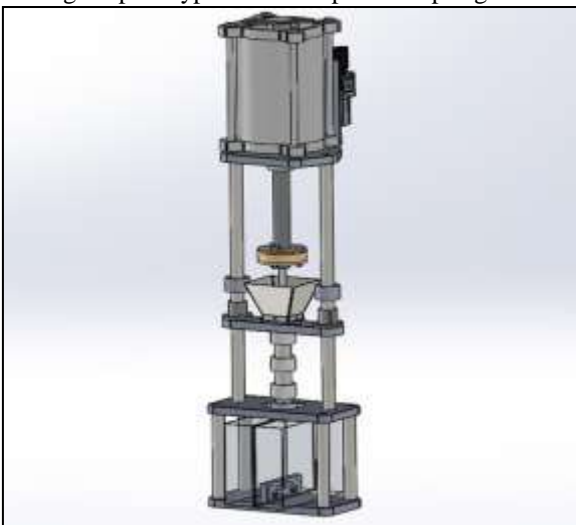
Design of Pneumatic Operated Injection Moulding Machine.
